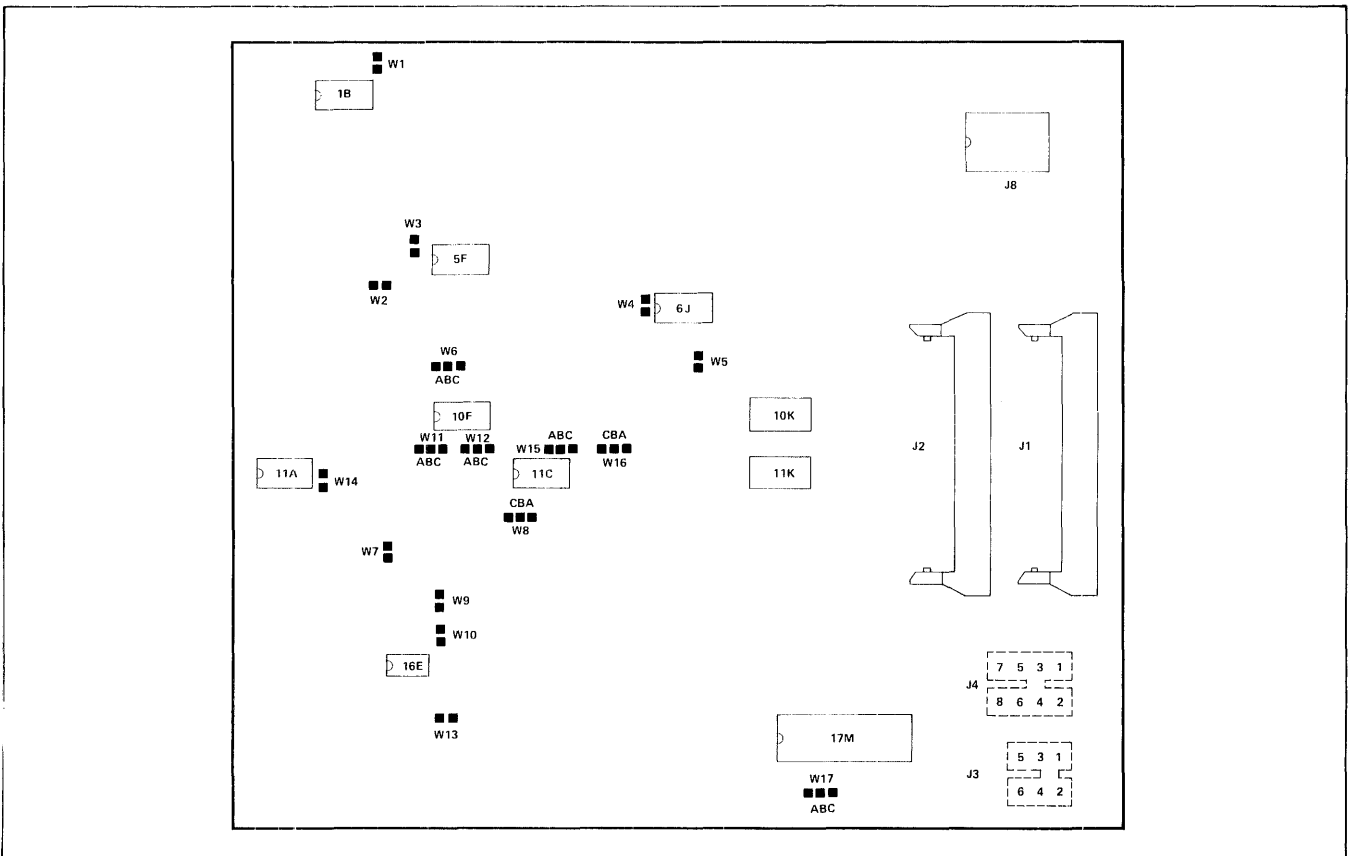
Jumper and DIP Switch Locations for Assembly P/N 200173
